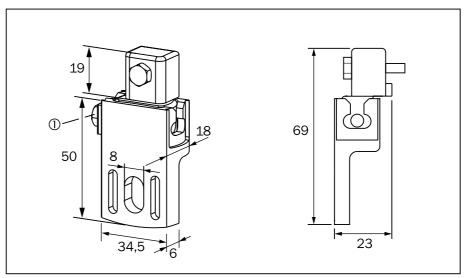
Side bracket for C 2000, M 2000 and M 2000-A/P 1 = Clamping screw
